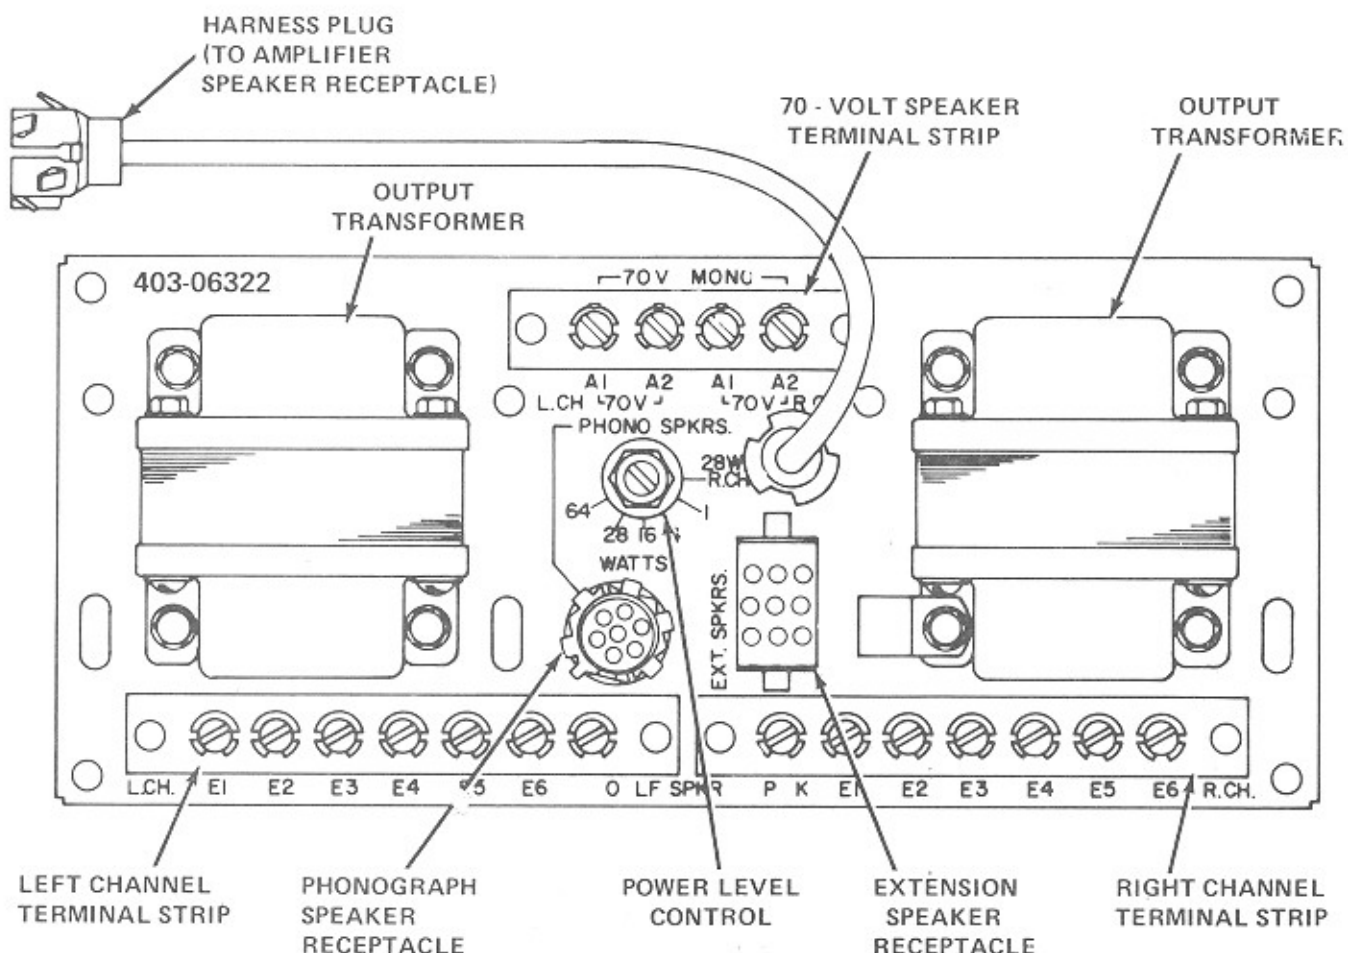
OUTPUT TRANSFORMER ACCESSORY PACKAGE
